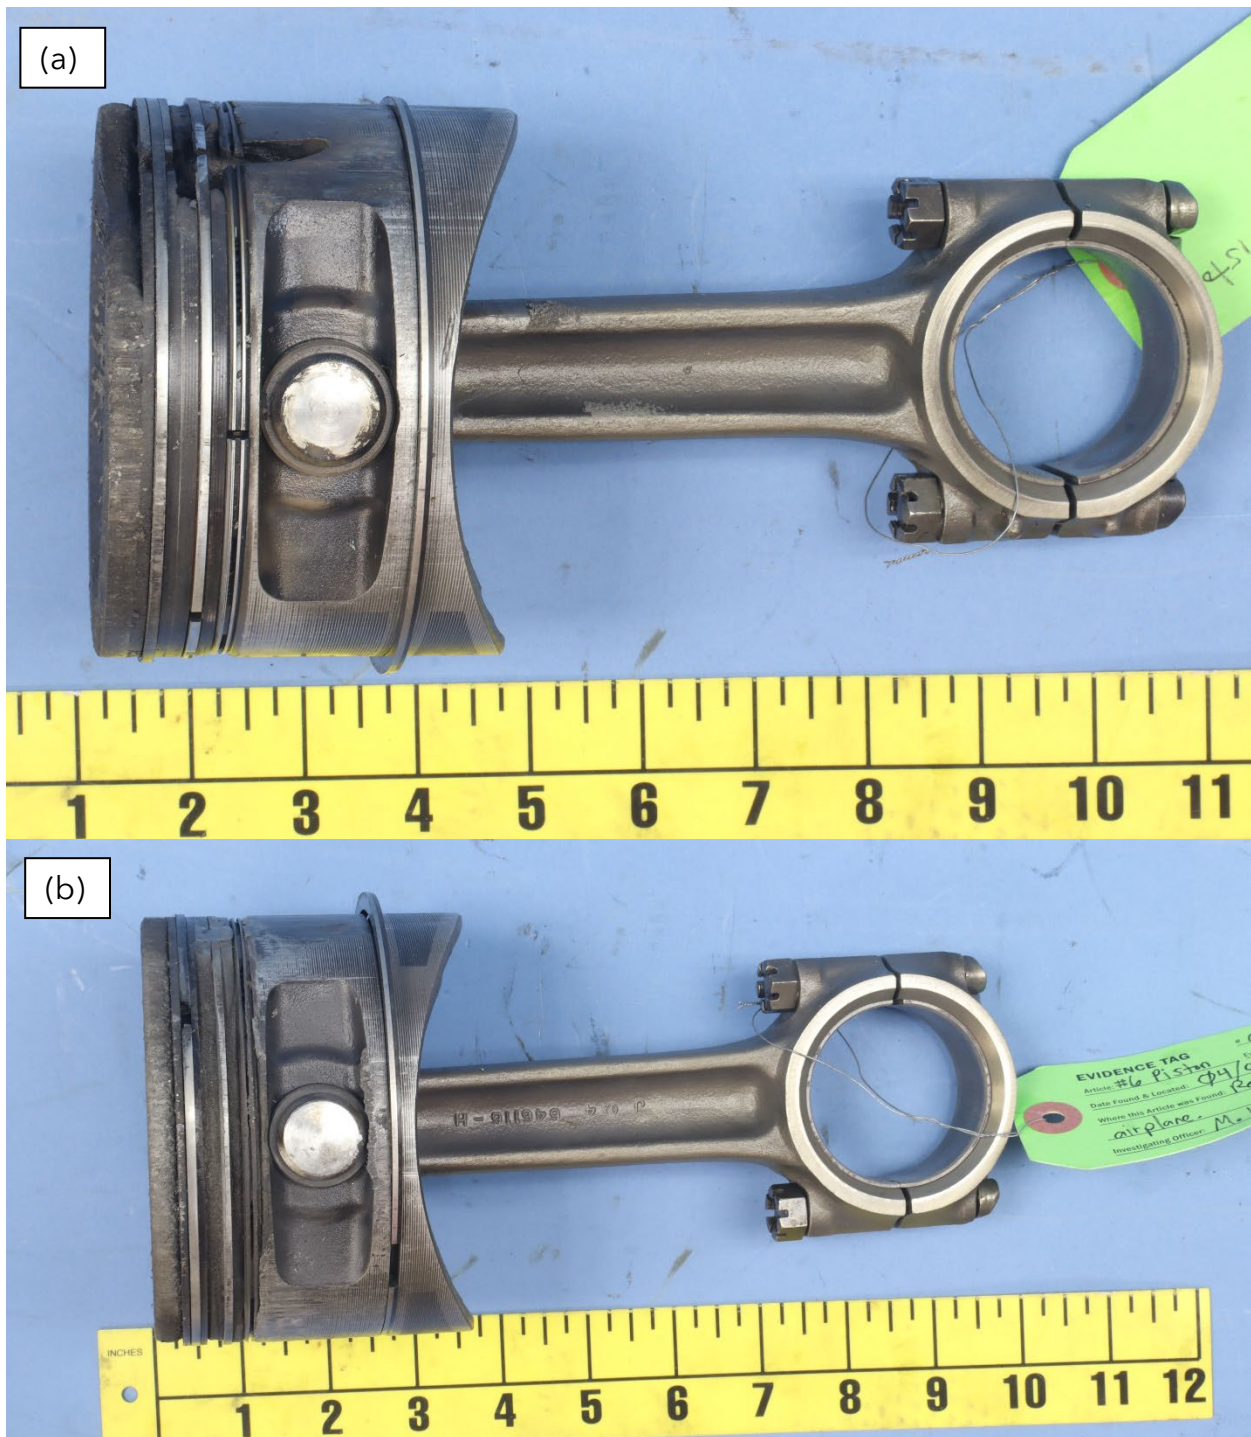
Opposite sides of the piston assembly from the #6 cylinder, on the piston pin faces.
